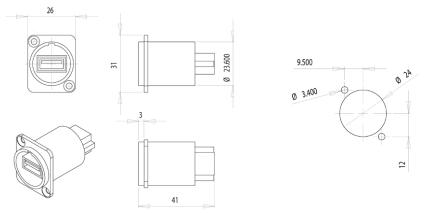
Dimensions and cut out of remote USB port [in mm]
